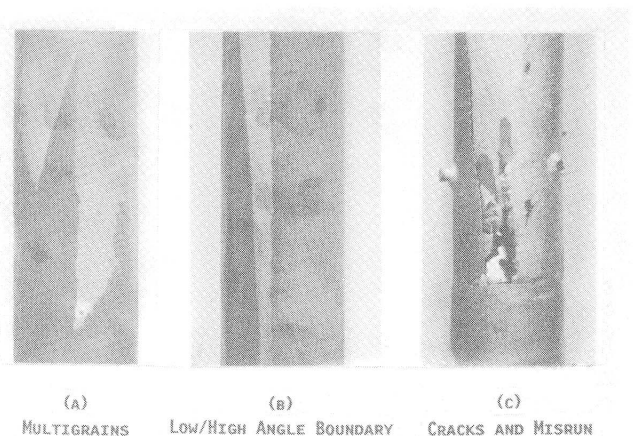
Photographs of multi-grains (A), low/high angle boundaries (B), cracks and misruns (C) in directionally solidified single-crystal castings.
